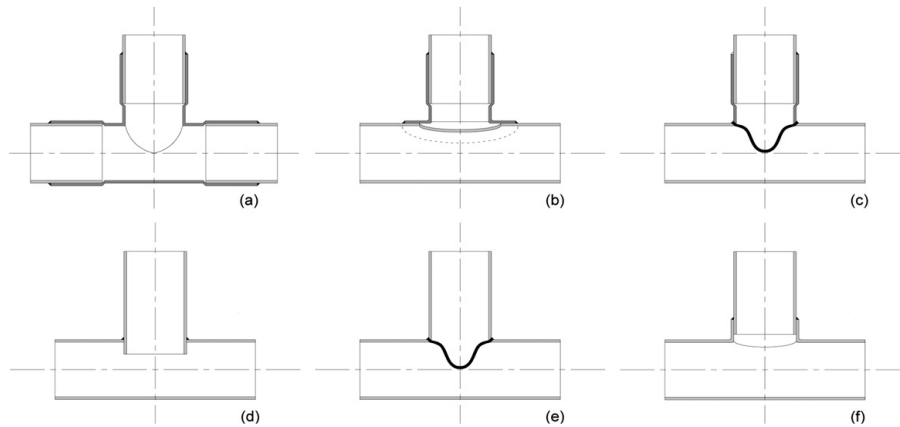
Conventional tube to tube joining methods by means of (a) tee fittings, (b) saddle adapters, (c) weld-o-lets, (d) nozzle-welds, (e) nozzle-welds and (f) spin-forming. (Alves and Martins 2012)
